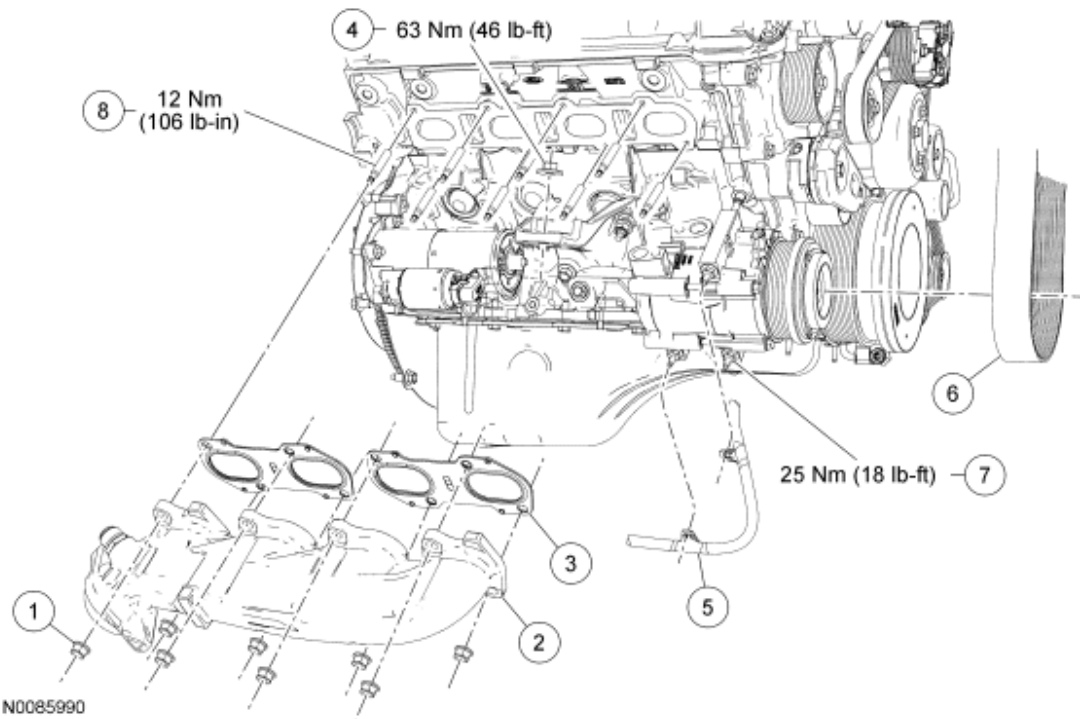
Exploded View Of RH Exhaust Manifold With Torque Specifications
